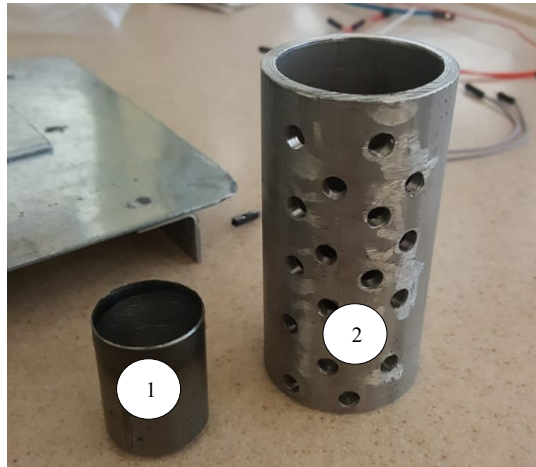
Combustion chamber parts 1 – cover for the hot zone 2 – chamber casing
